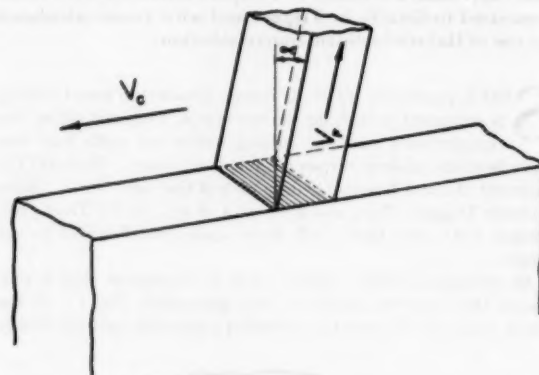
WORKPIECE-CHIP SYSTEM FOR THERMAL PROBLEM
